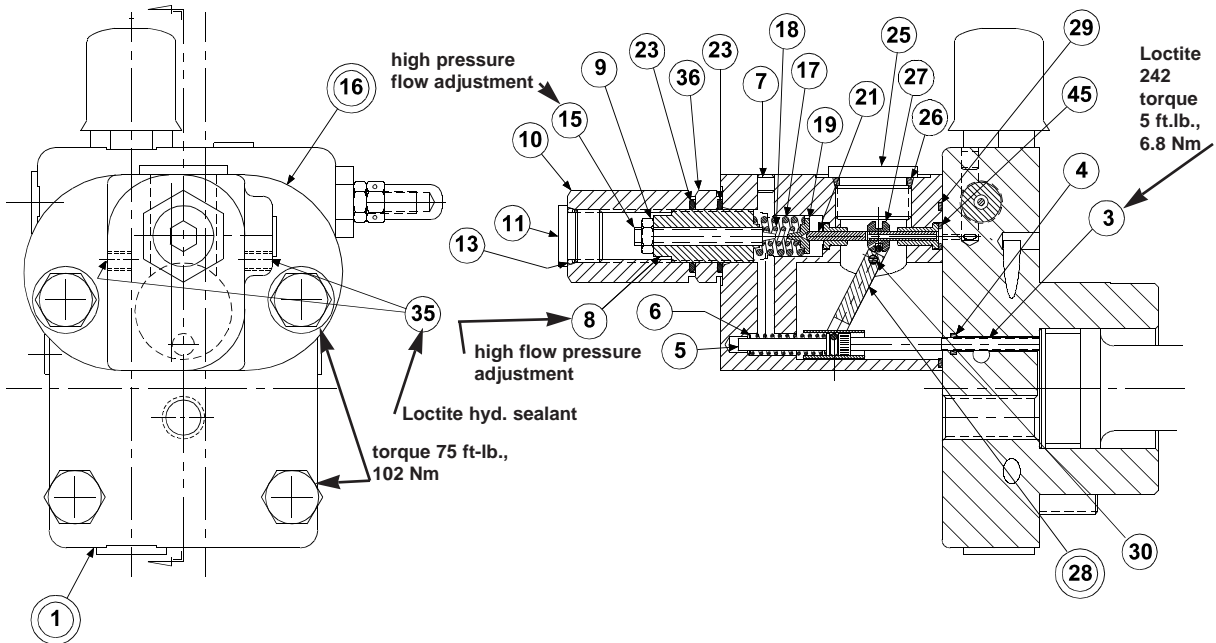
TORQUE LIMITER ASSEMBLY
